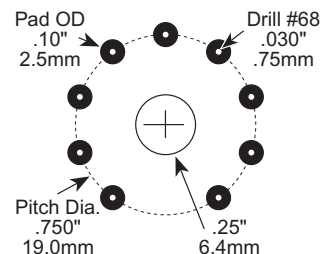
The recommended PCB pad for 9-pin Iso-sockets is shown above at 125% scale.
